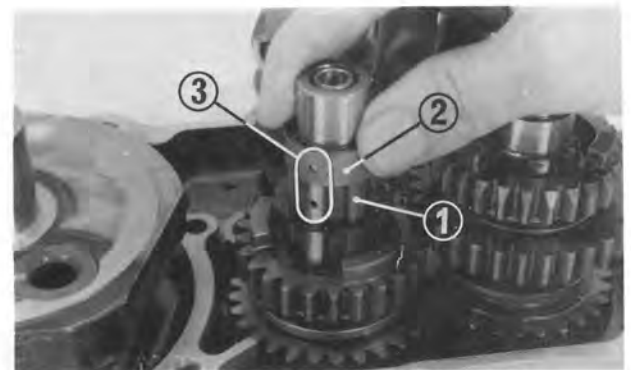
(1) Countershaft (2) Splined collar (3) Holes
